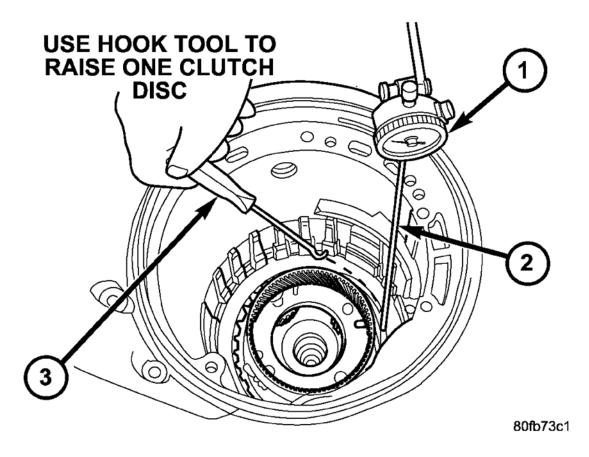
Checking Low/Reverse Clutch Clearance Courtesy of CHRYSLER LLC
